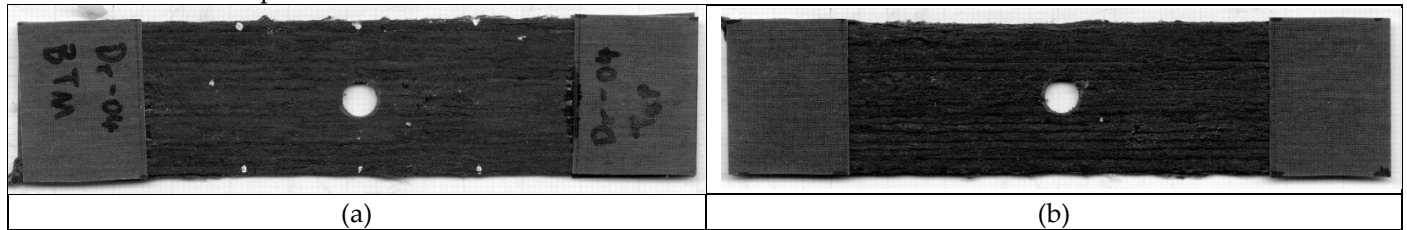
Drilled sample on three layers 3D printed part: (a) top side; (b) bottom (bed) side.
